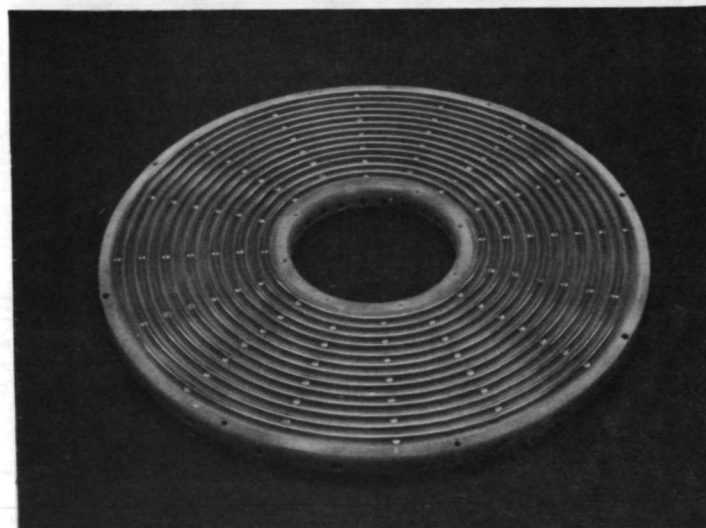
Welded Rings After Clean Up of Welding Debris
